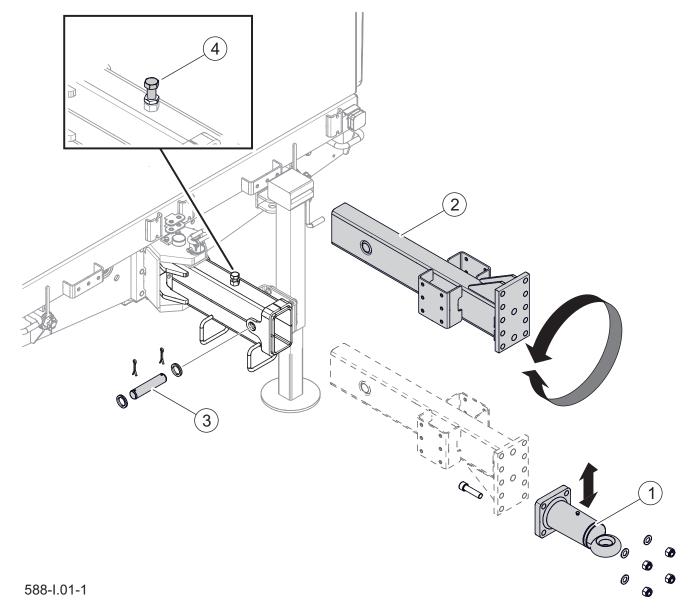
Adapt the machine to the lower hitch of the carrier vehicle
